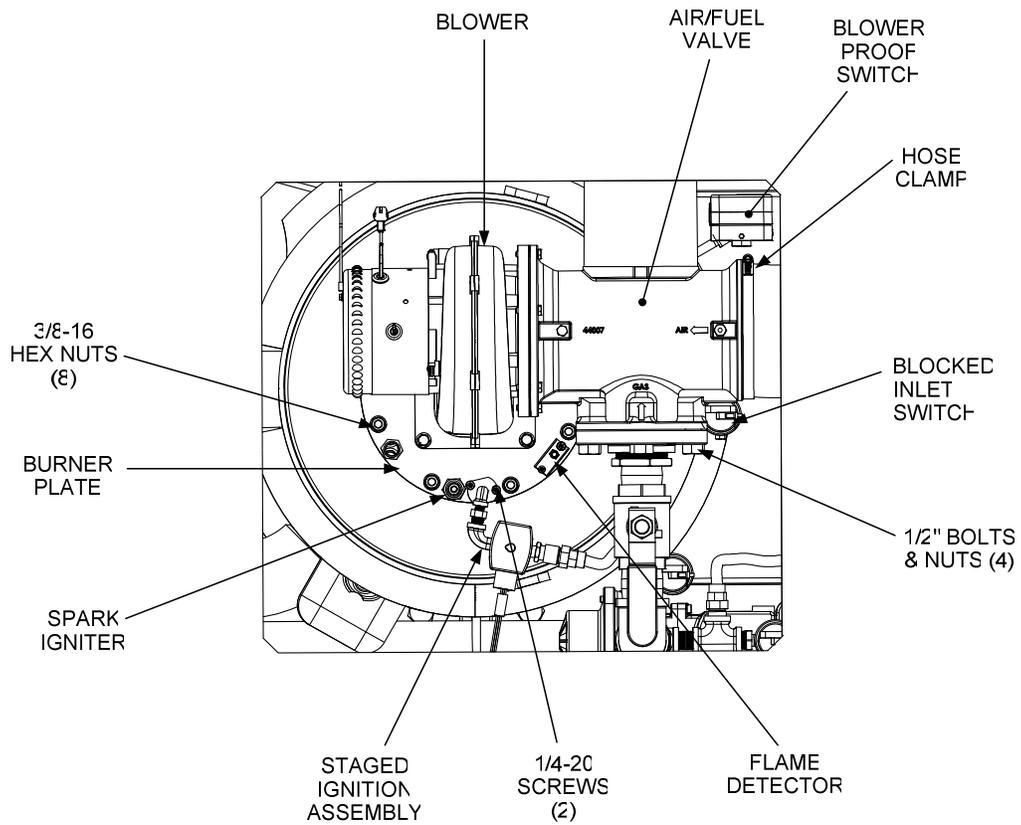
Benchmark 1.5LN Burner Assembly Removal
